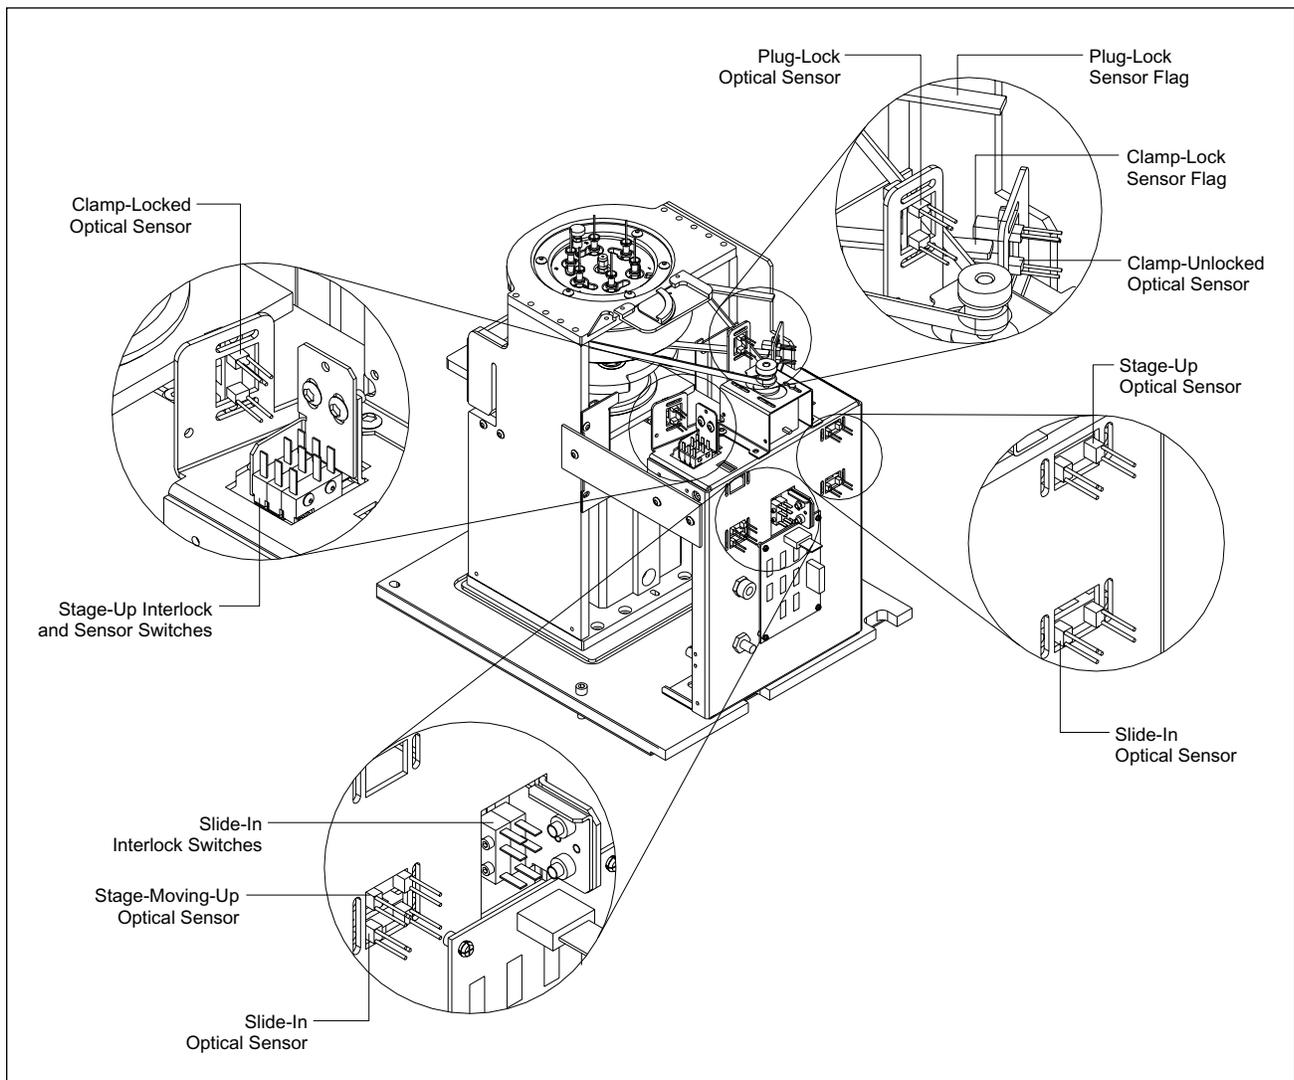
Anode Assembly, Switch and Sensor Locations.
